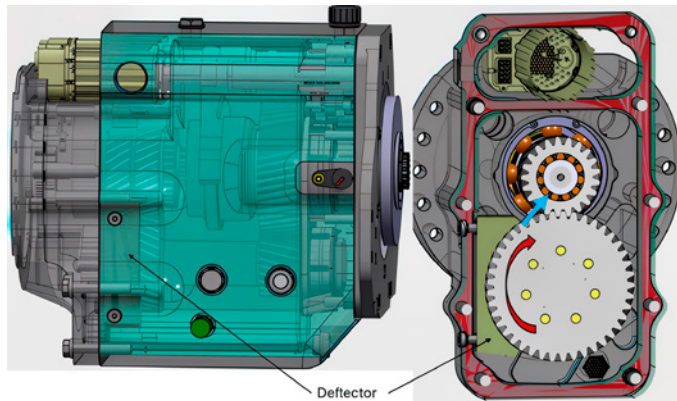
Two-speed gearbox isometric and cutaway views showing the deflector.
